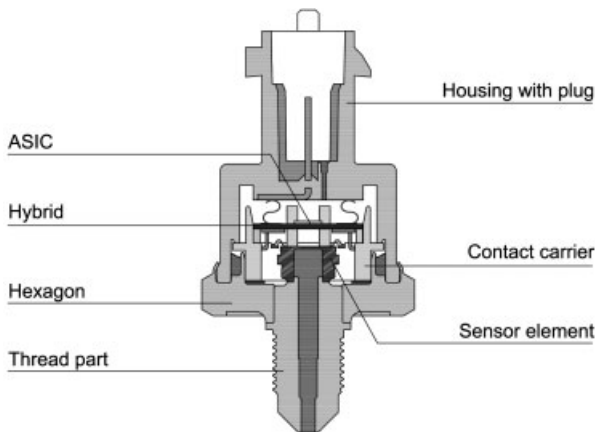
Cross section of sensor package for metal thin-film sensor used for gasoline direct injection
